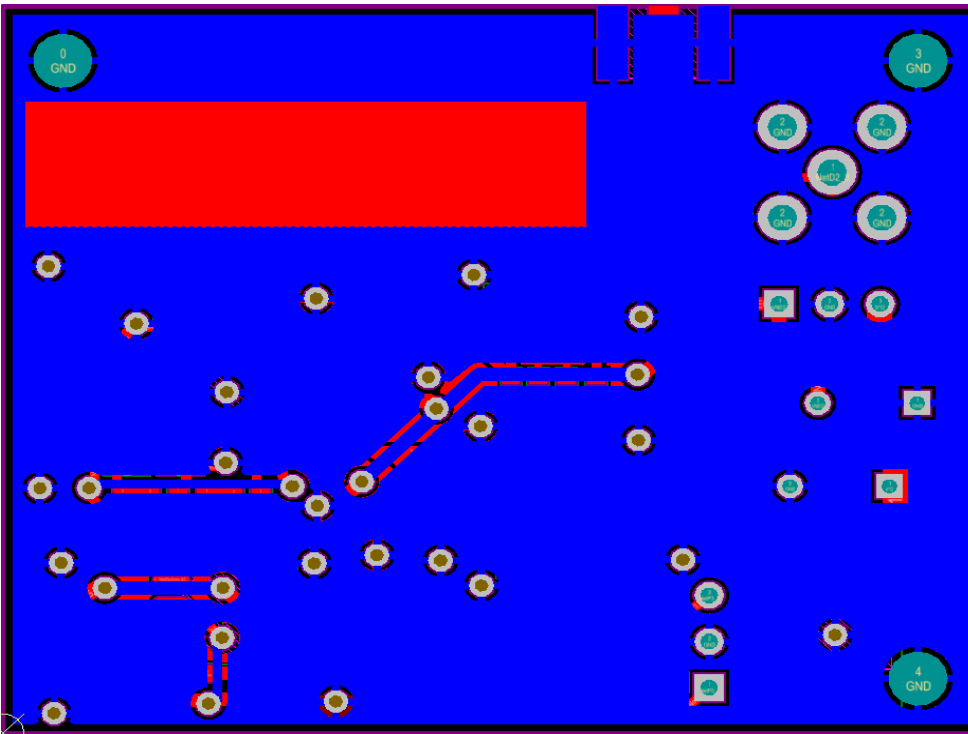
Showing the bottom side of the final photo sensor and phase detector circuit PCB.
